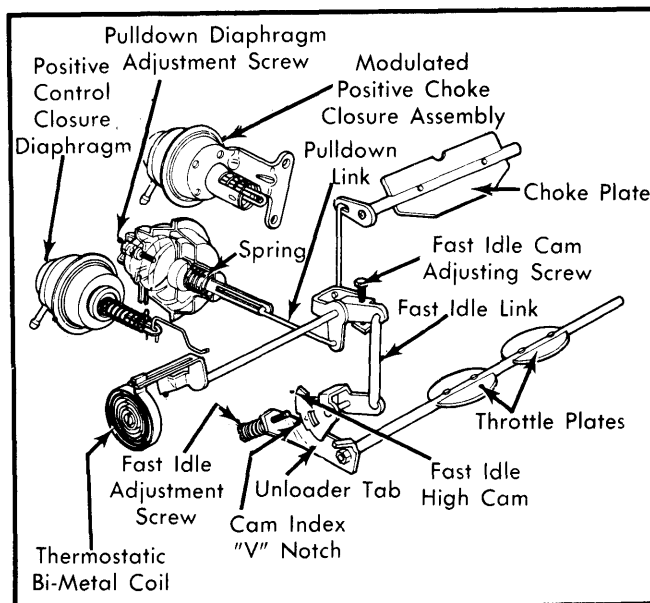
Choke Pulldown Assemblies Used on Motorcraft Model 2150 Carburetors
